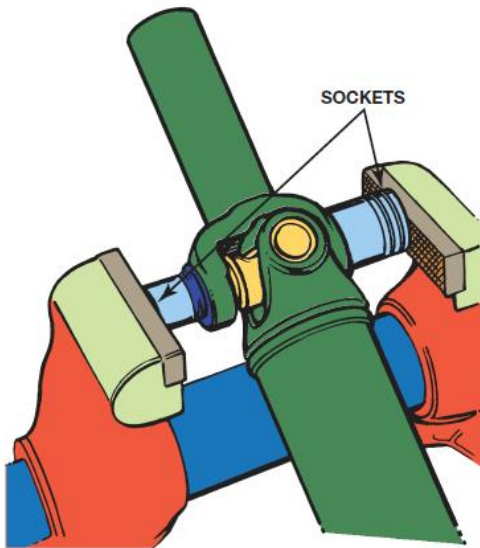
Use a vise and two sockets to remove a U-joint. One socket fits over the bearing cup and the other fits on the bearing to press-fit the cups from the crosspiece.
